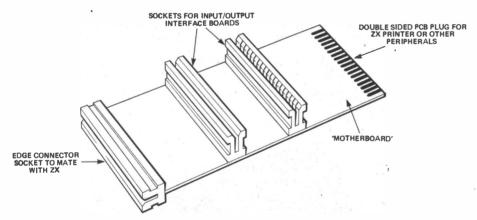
A mother board with sockets for I/O interfaces, connections for a ZX printer or Rampack, etc.
